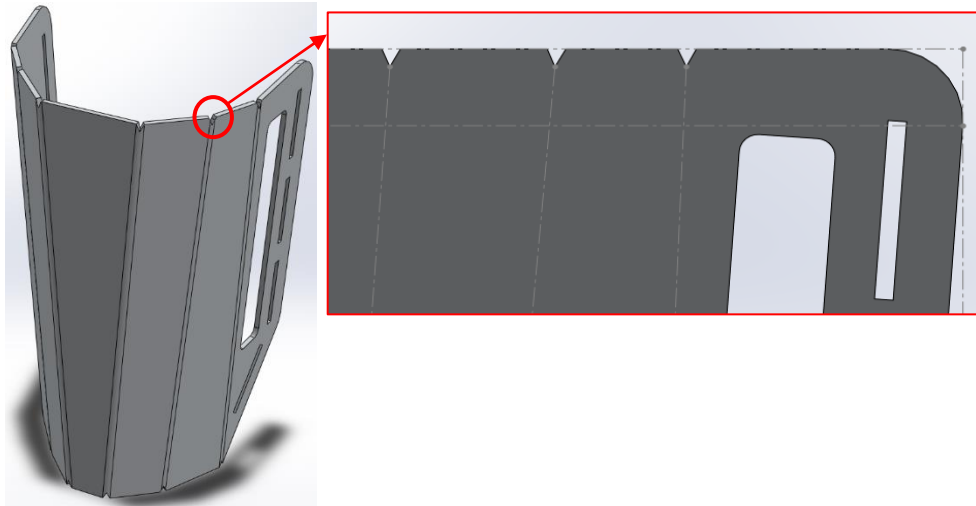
Design detail added to facilitate the sheet metal bending process. This way the machine’s punch can be correctly aligned to the bending centrelines defined to achieve a folded-up geometry.
